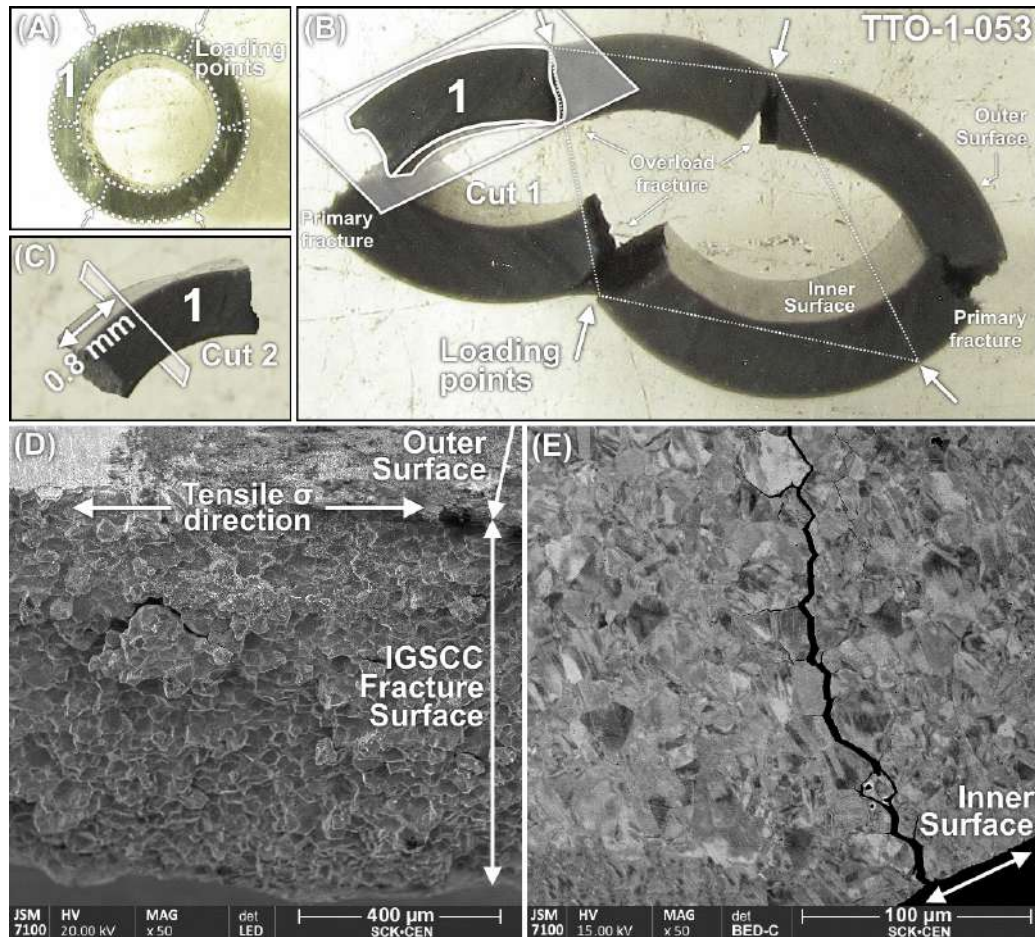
TTO-1-053 O-ring cutting scheme. (A) Intact O-ring specimen prior to constant load testing. (B) O-ring post constant load compression testing. Indications of the loading points and transversal cut along the middle of the specimen are depicted. (C) Second cut of the remaining piece, close to the primary fracture surface. (D) Secondary electron SEM view of the fracture surface illustrating the full intergranular mode. (E) Backscattered electron SEM view in edge-on orientation illustrating the extent of branched cracking from the inner surface.
